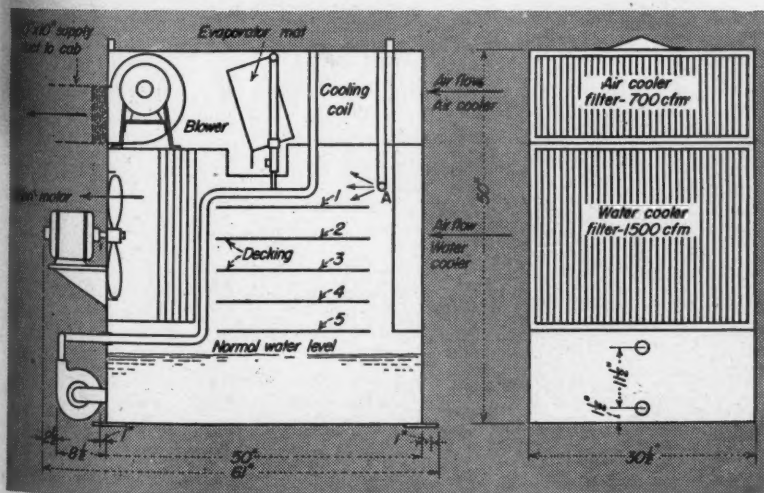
Sectional view of cooling unit showing water and air cooling process.
